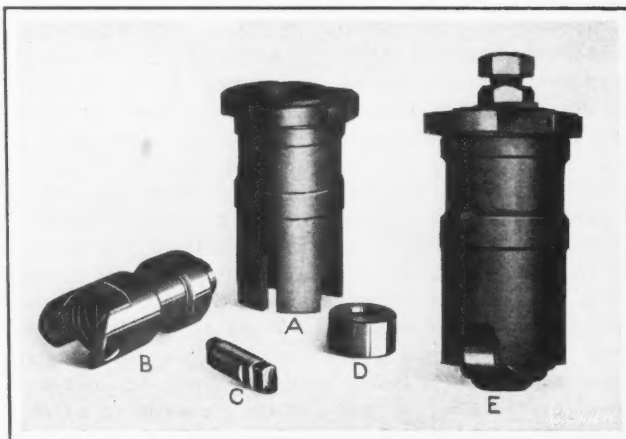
Valve Tappet and Disassembled Parts used in the Hudson "Super-Six" and Essex Automobile Engines
